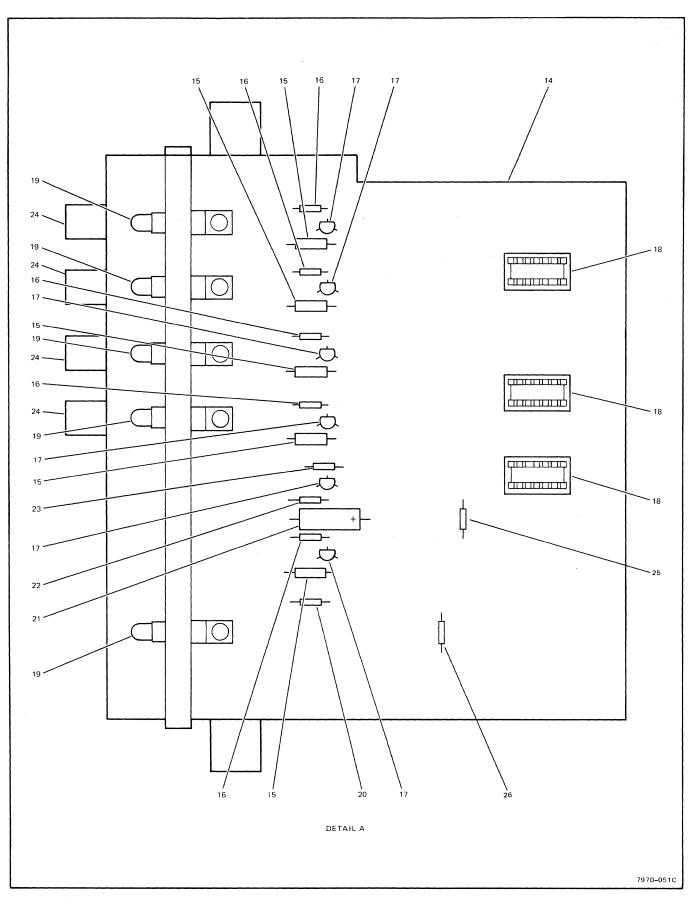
Control Switch Assembly A11 (Sheet 1 of 2)
